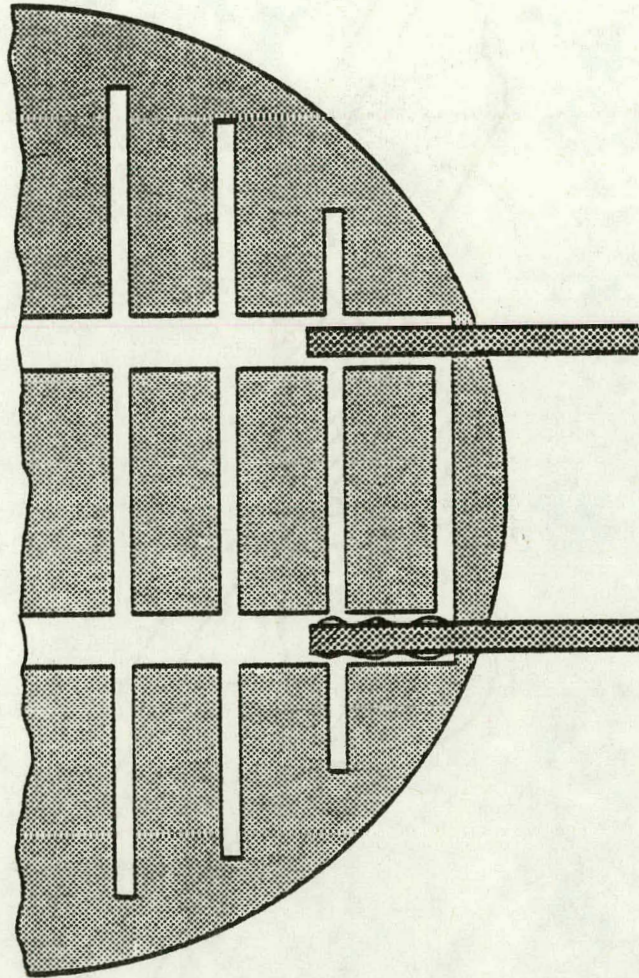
Interconnect Contact Solder Dewetting. Reject.
